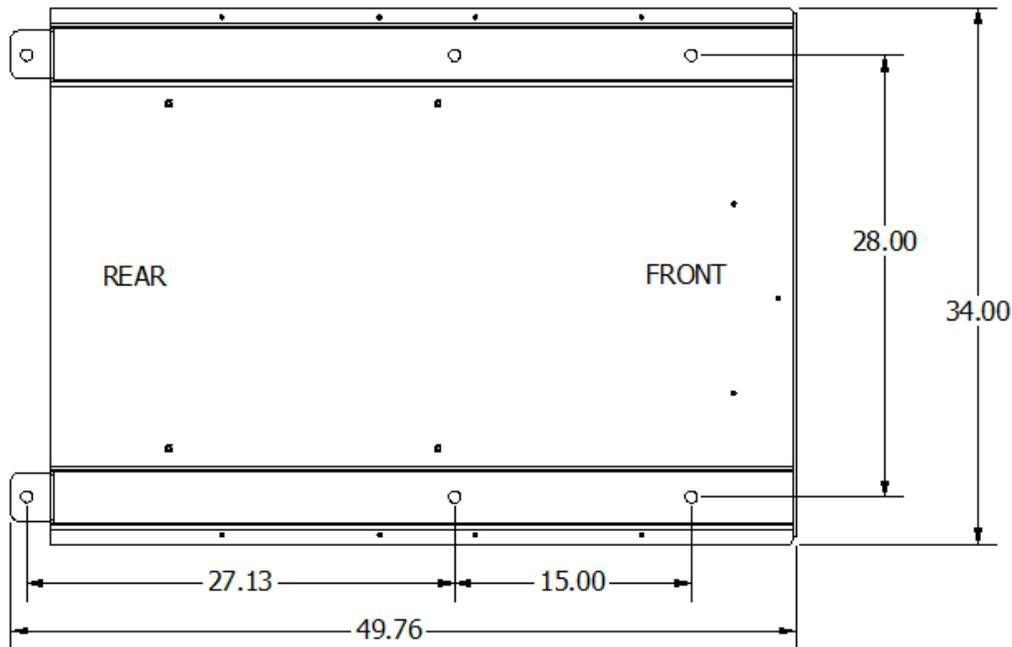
BMK E 216-684 Anchor Bolt Locations
